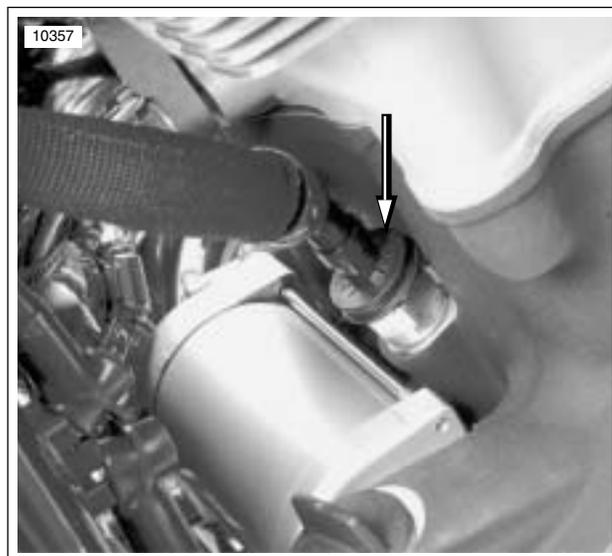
Crankcase Oil Line (oil in) Fitting
